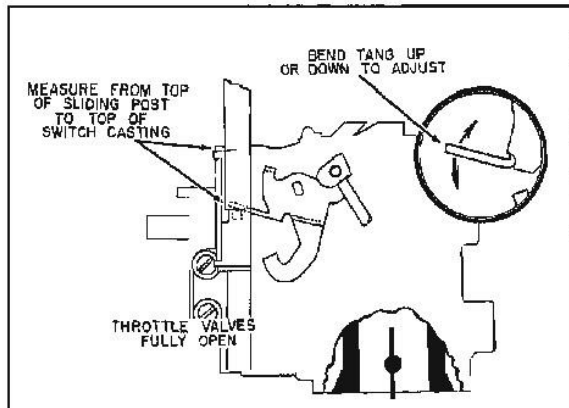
B-106 Vacuum Switch Adjustment (Center Carburetor)
